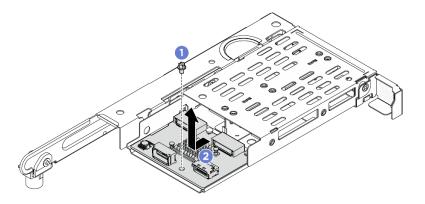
Removing the M.2 backplane from 1FH M.2 riser cage
